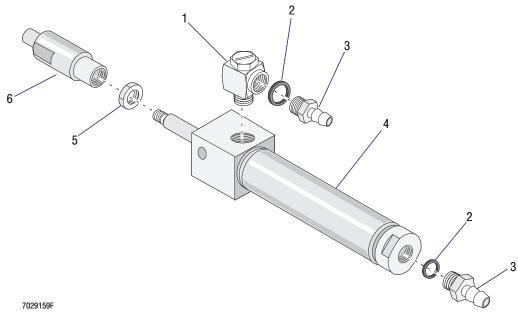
Air Cylinder and Related Hardware for Front and Rear Segmenting Valve Pads (See Table 8.2-36)
